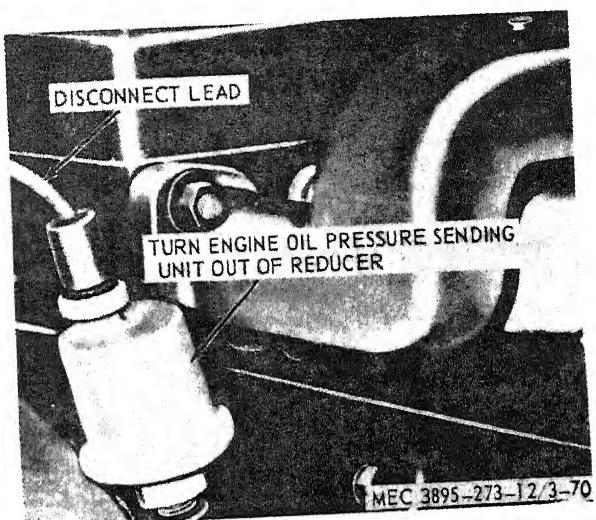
Engine oil pressure sending unit, removal and disassembly.
